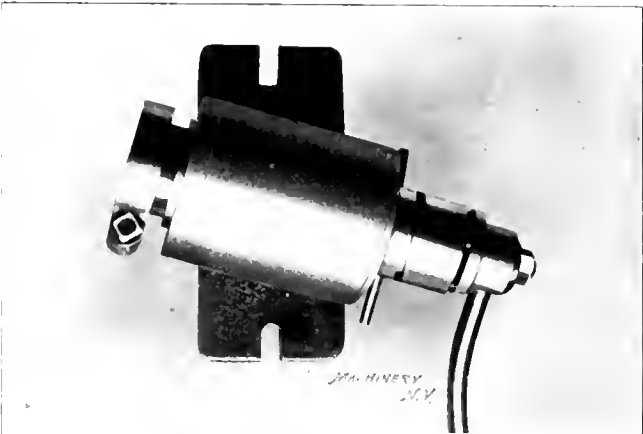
Fixture for Holding Three-tooth Claw-clutches when Milling the Teeth
